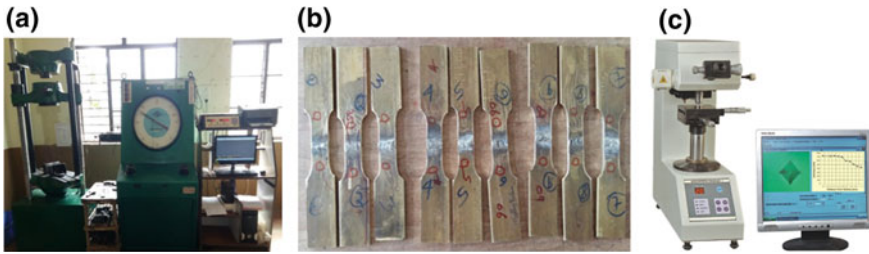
a Tensile test apparatus (UTM). b Tensile test samples. c Vickers hardness testing machine
